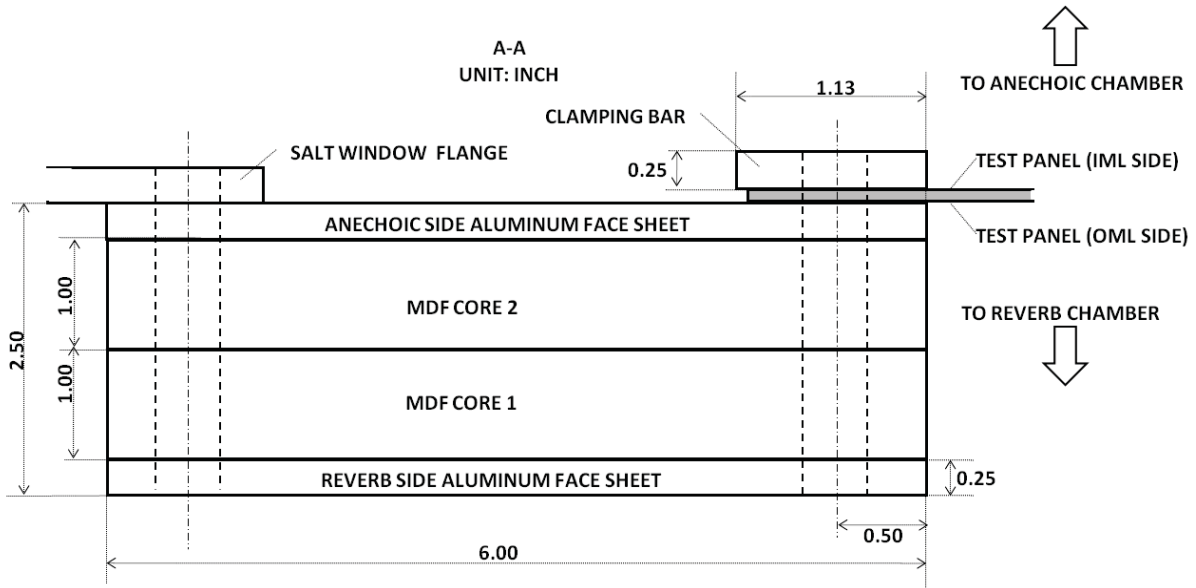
ADAPTOR FRAME CROSS SECTION GEOMETRY
